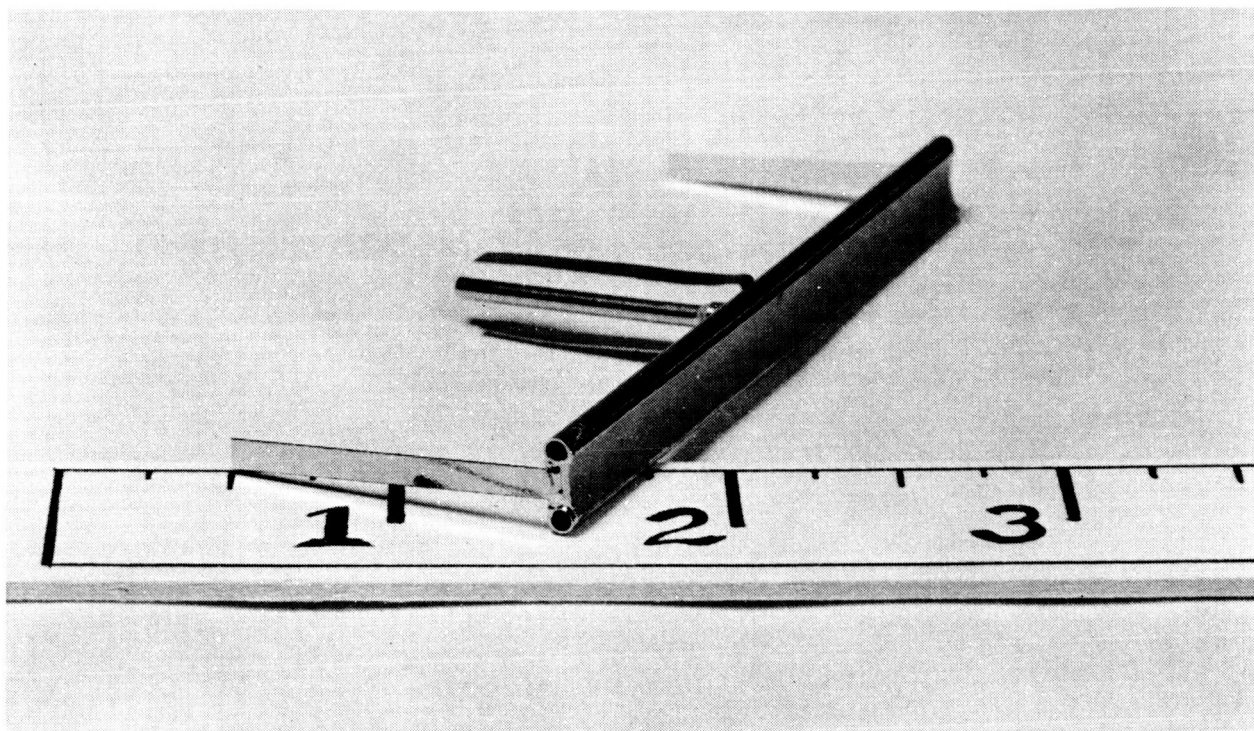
Low-mass ionizer (LMI-E), showing heater tubes, manifold plates, support straps and feed tube all electron beam welded to the porous emitter. (Scale in inches)
